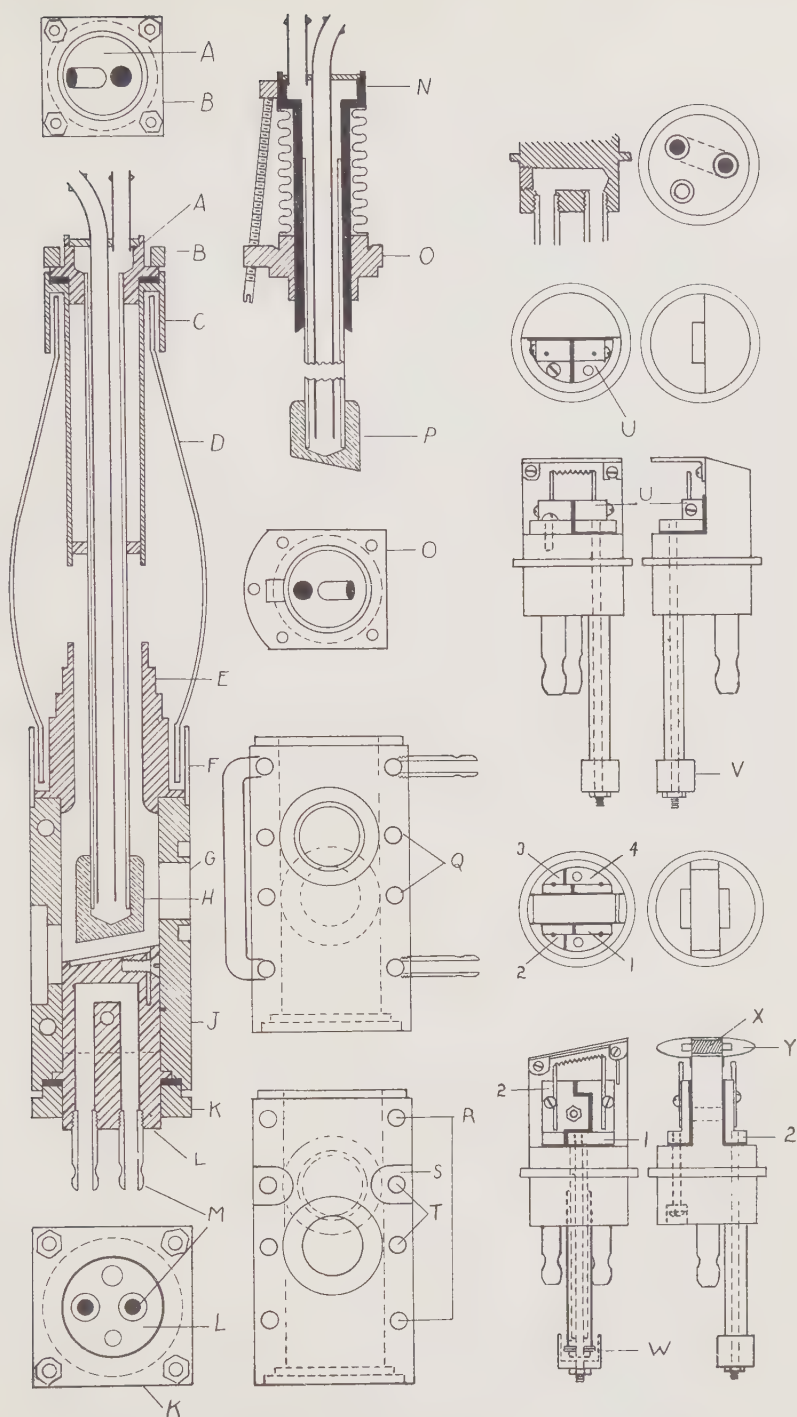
DETAIL DRAWING OF X-RAY TUBE
